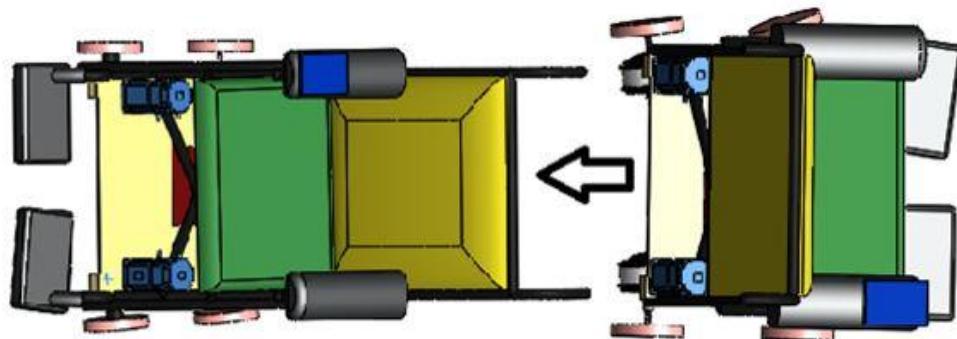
Zero Turn Steer on a Modified Wheel Chair
